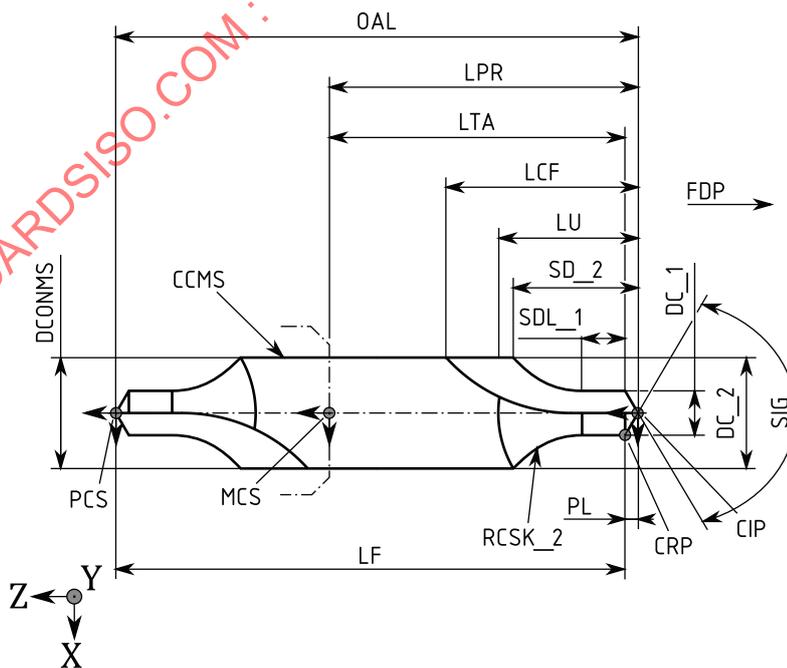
ISYC 302-07 - Centre drill, type R, solid
